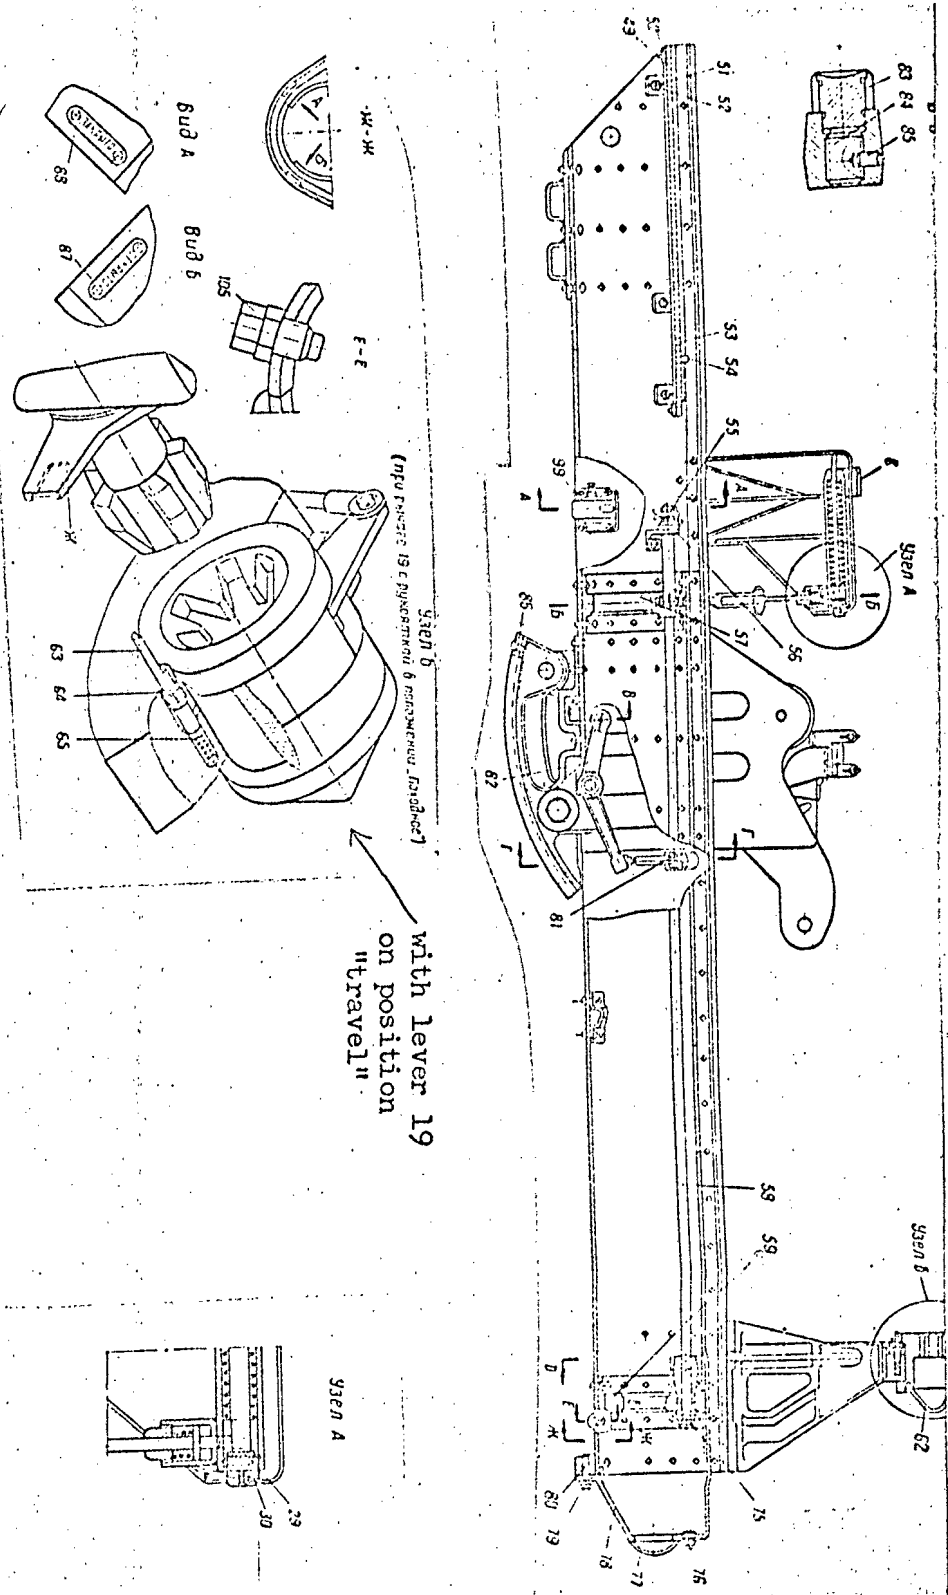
Cradle (right side, cross-sectional view) (Part 1)
